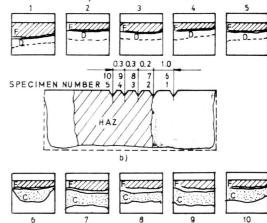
Scheme of crack tip position in welded joint and fracture surface of specimens (F - fatigue precrack, C - cleavage fracture, D - ductile fracture) Specimens 1 and 6 are in WM, 2 and 7 at the fusion line, specimens 3 and 8 in HAZ at 0.2 mm distance from fusion line, 4 and 9 in HAZ at 0.5 mm, and specimens 5 and 10 at 0.8 mm distance from fusion line. Specimens 1 - 5 tested at room temperature, specimens 6 - 10 tested at -60°C.
